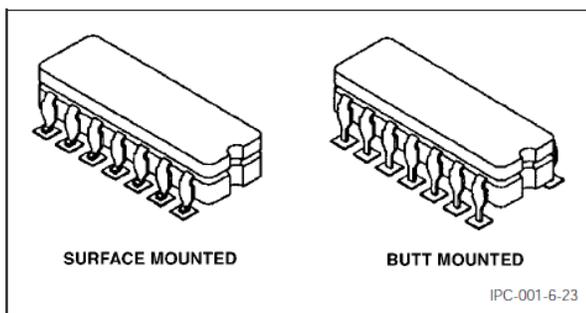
Surface Mounted and Butt/I Mounted DIPs
